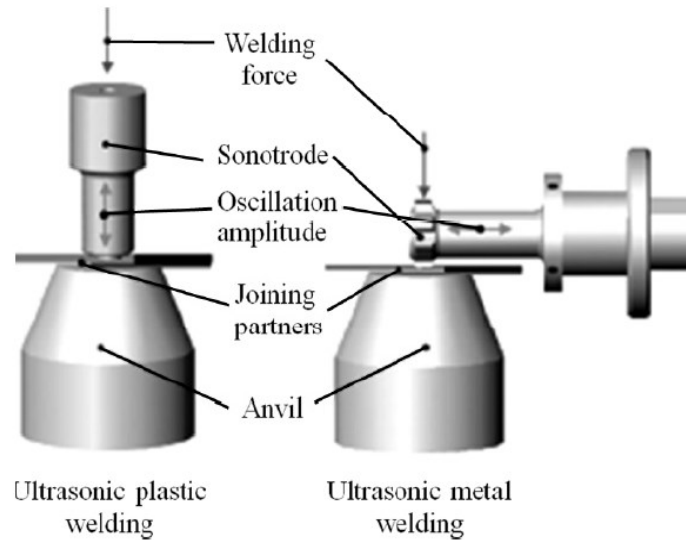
Ultrasonic welding schematic diagram(Kah;Suoranta;Martikainen;& Magnus, 2014).
